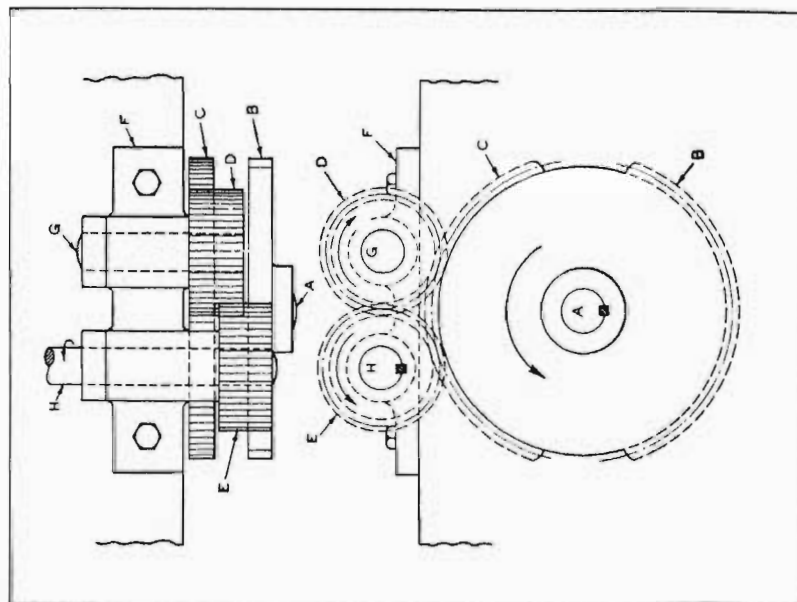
Mechanism Shown in Fig. 7 with Driving Shaft A Rotating Driven Shaft H in a Counter-clockwise Direction.
